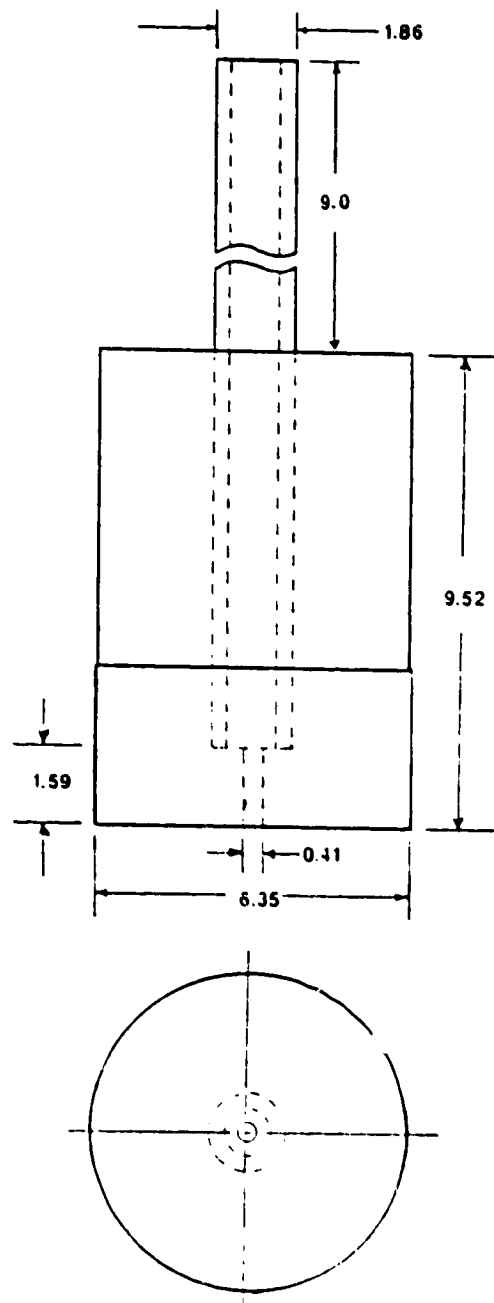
Static pressure port insert. All dimension in millimeters.
